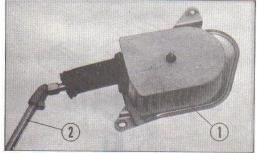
CB175, CL175 1 Air cleaner element 2 Nozzle
